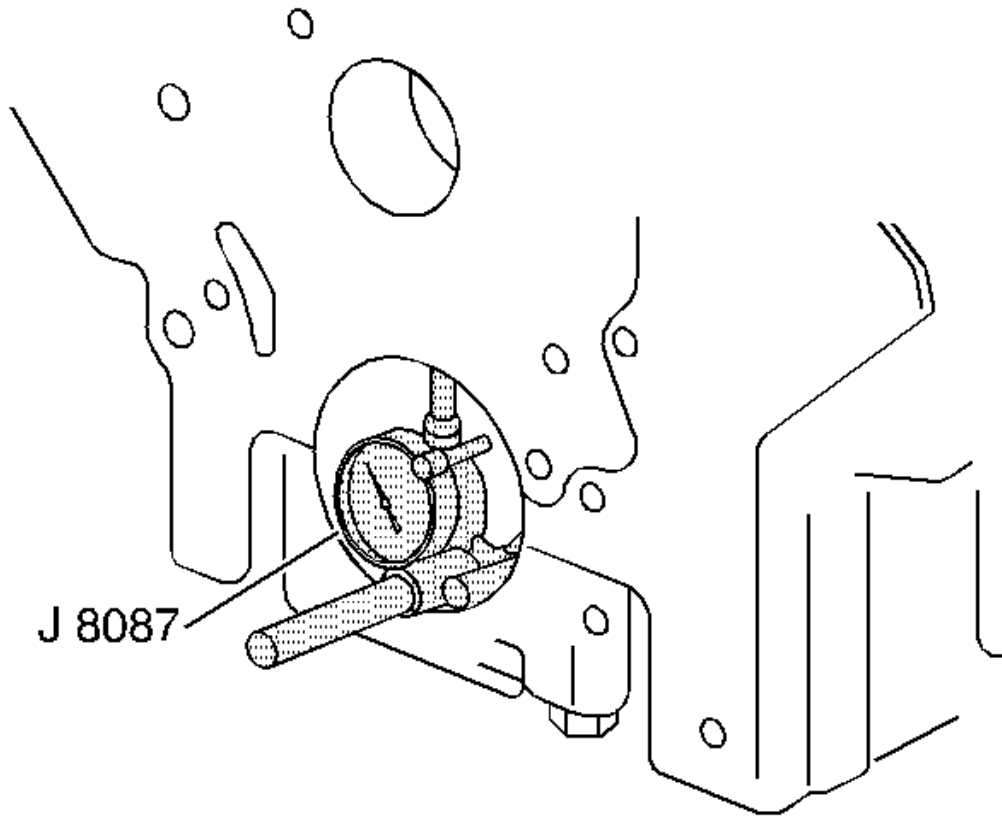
Inspecting Crankshaft Main Bearing Bores
